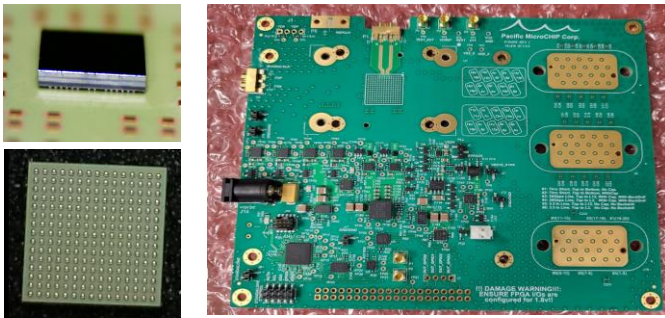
Assembled chip and BGA package (left), the evaluation PCB (right).
